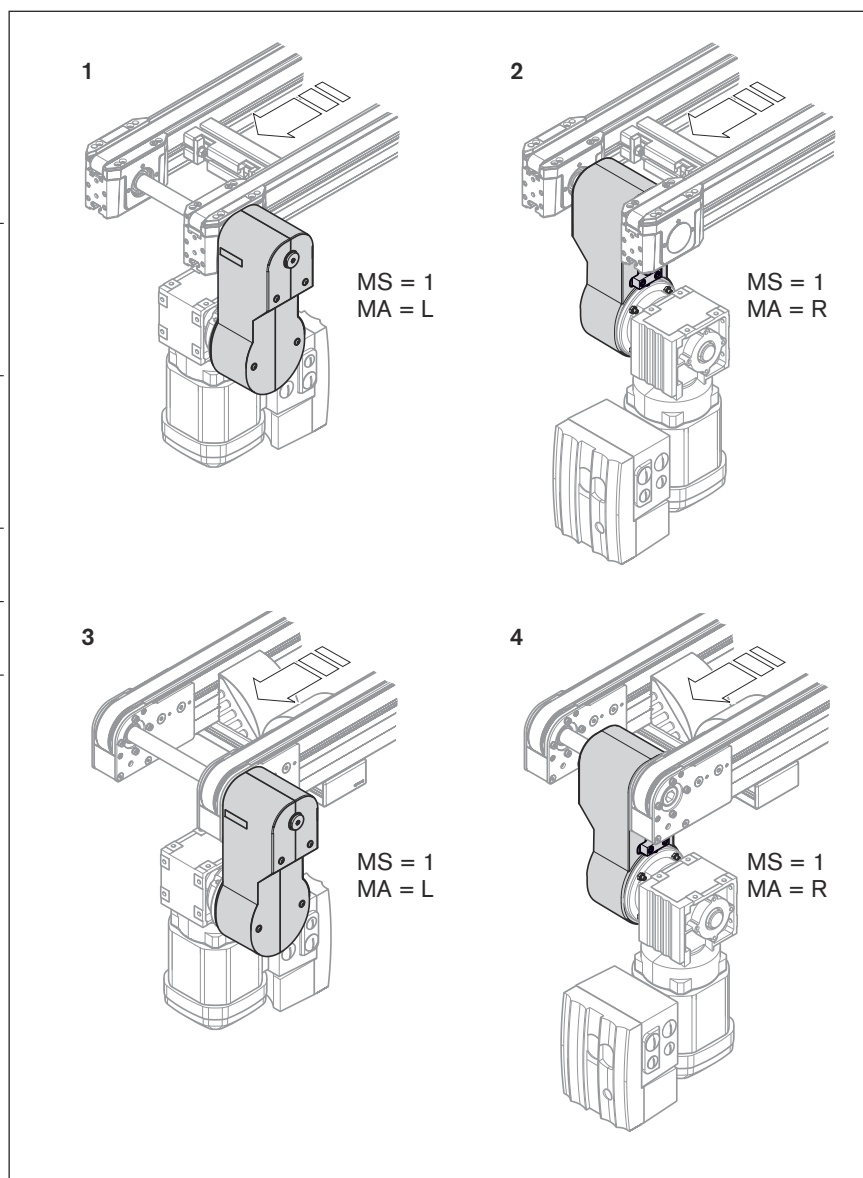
Possible mounting positions at belt section, examples CSS/...
